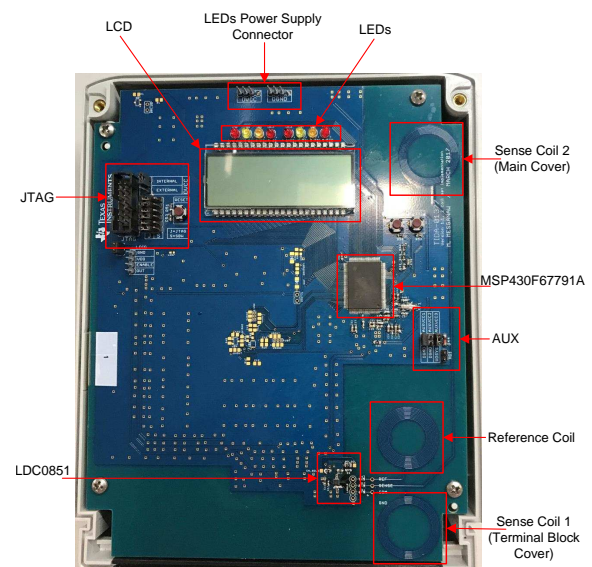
TIDA-01377 Two-Sense-Coil Variant PCB With Components Highlighted—Top View
